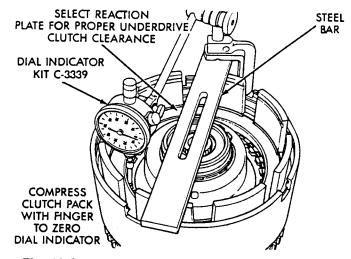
Set Up Dial Indicator for Clutch Clearance
